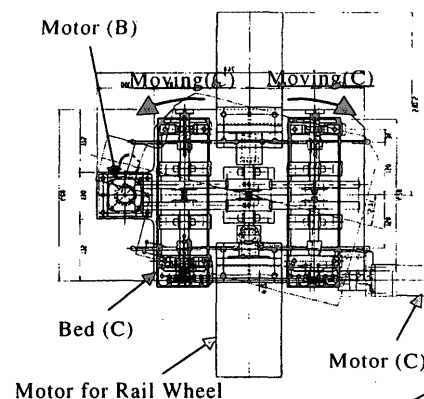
Picture of Test Equipment of 1/5 Scale Model for Rolling Stock (Roller Rig)
